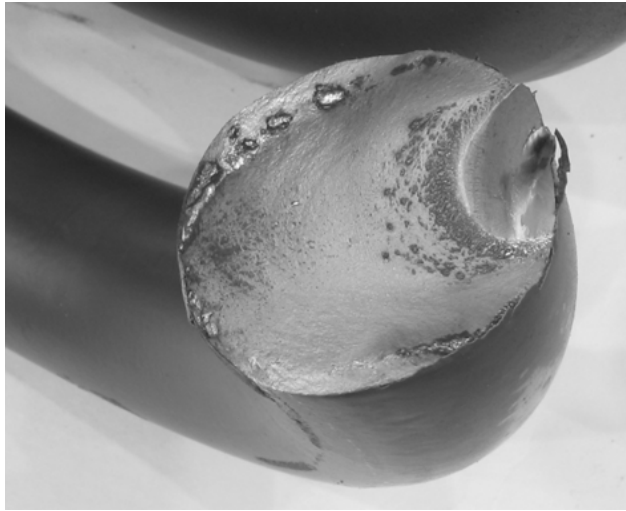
Fatigue fracture of suspension spring initiated at surface [8]
